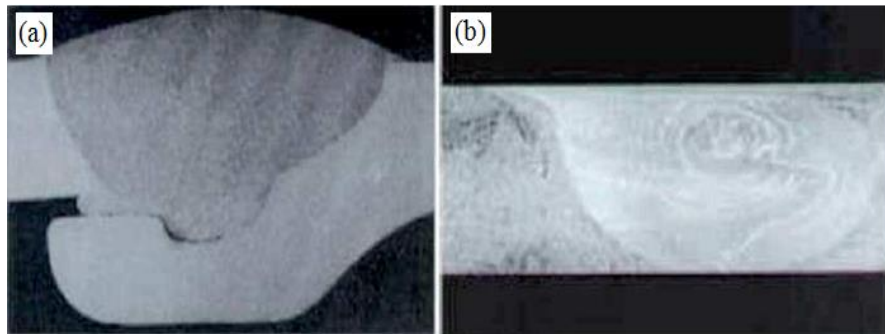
(a) Traditional Weld and (b) FSW weld
